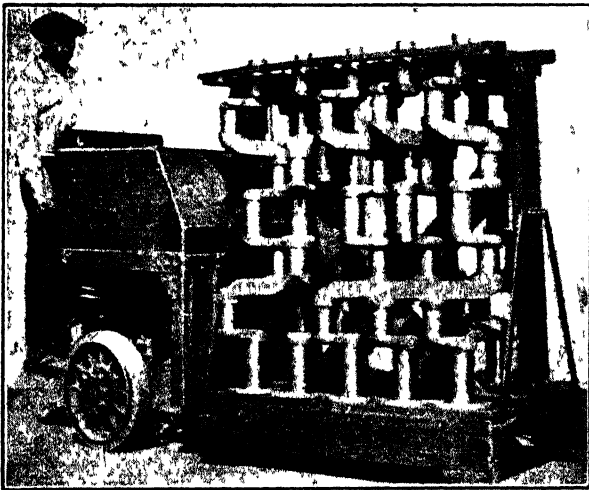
Specially designed skid platforms are used for handling and storing crankshafts in this factory. Motive power is supplied by electric-lift trucks. (Courtesy of *Factory and Industrial Management*.)
